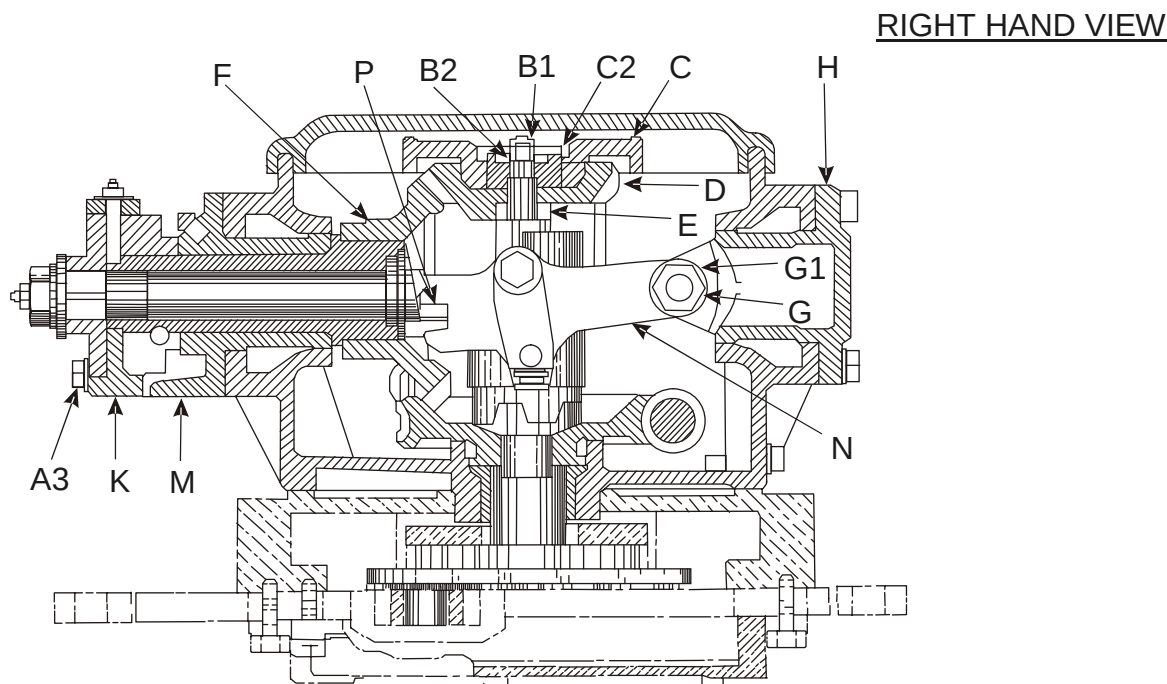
Sectional View of M-23A Gearbox, Looking from Motor End
